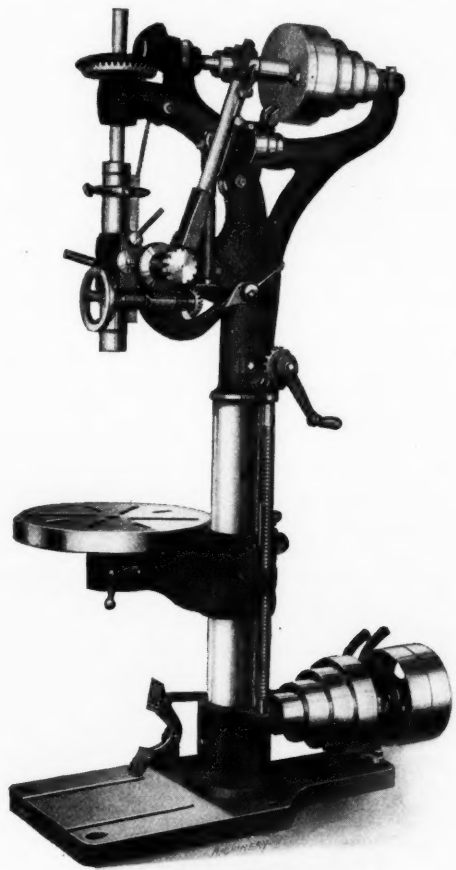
Upright Drilling Machine built by Richards Machine Co.
